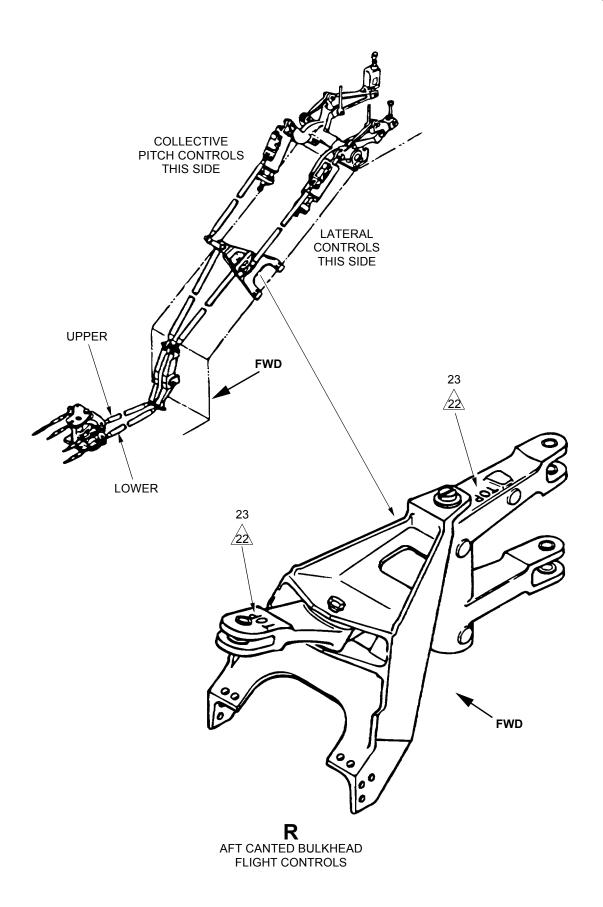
Component, Equipment, and Equipment Container Markings (Sheet 8)
